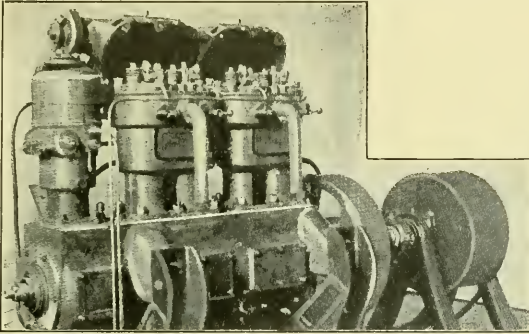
30-H.P. FOUR-CYLINDER 600-R.P.M. FOUR-STROKE DIESEL ENGINE, BUILT IN 1909 EXPERIMENTALLY AS AN AUTOMOBILE ENGINE
